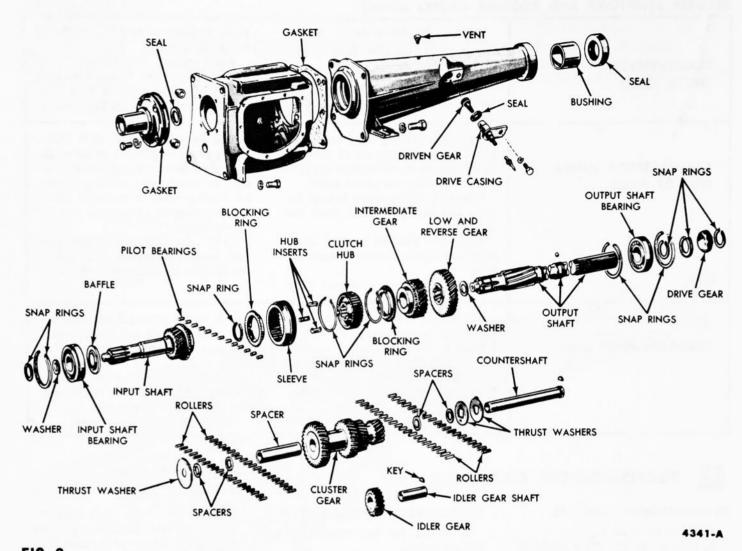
Speed Conventional Drive Transmission Disassembled
